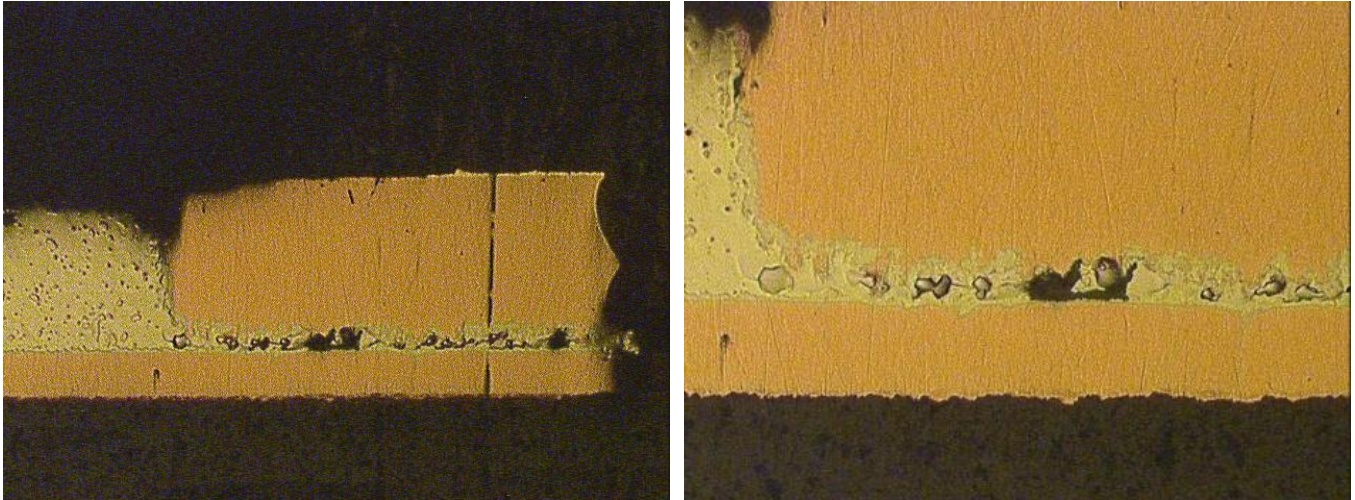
QFN-20 Solder Joints, Board 104, Component U27, SN100C/Sn, DNF
